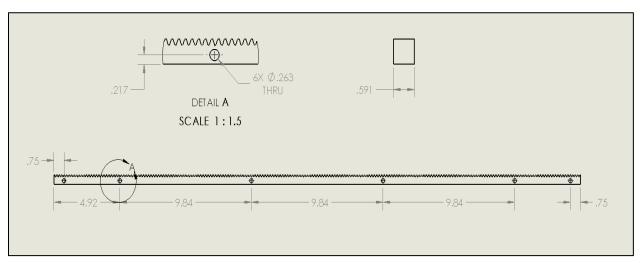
SolidWorks drawing used to drill mounting holes in a 1000 m length of rack.
